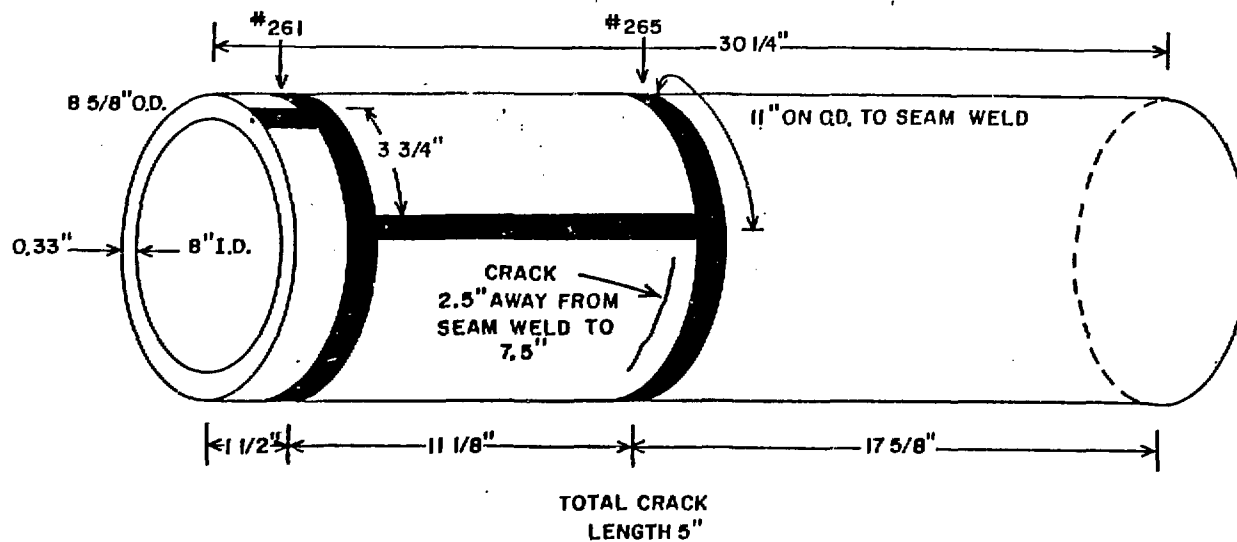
Location of welds and crack on 30 1/4" piece of 8" stainless steel pipe.
